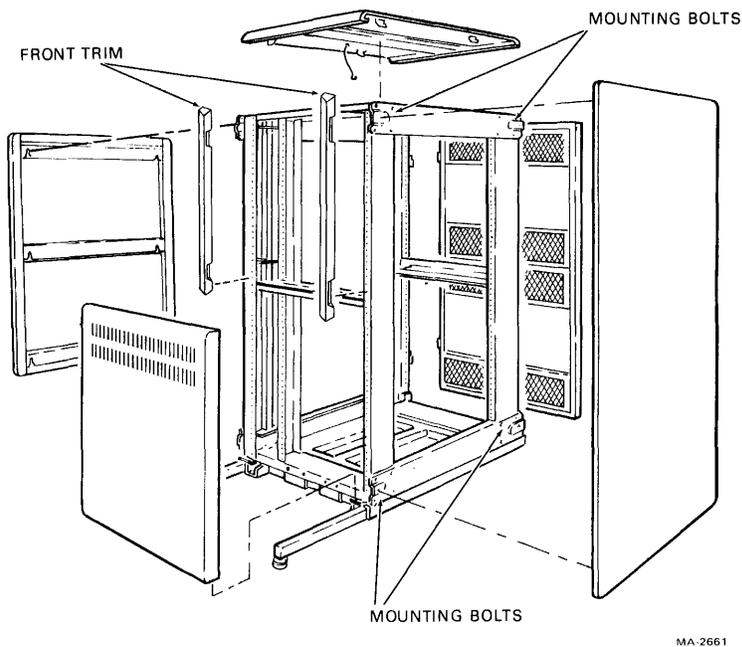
Corporate Cabinet with Side Panels and Top Cover Removed
